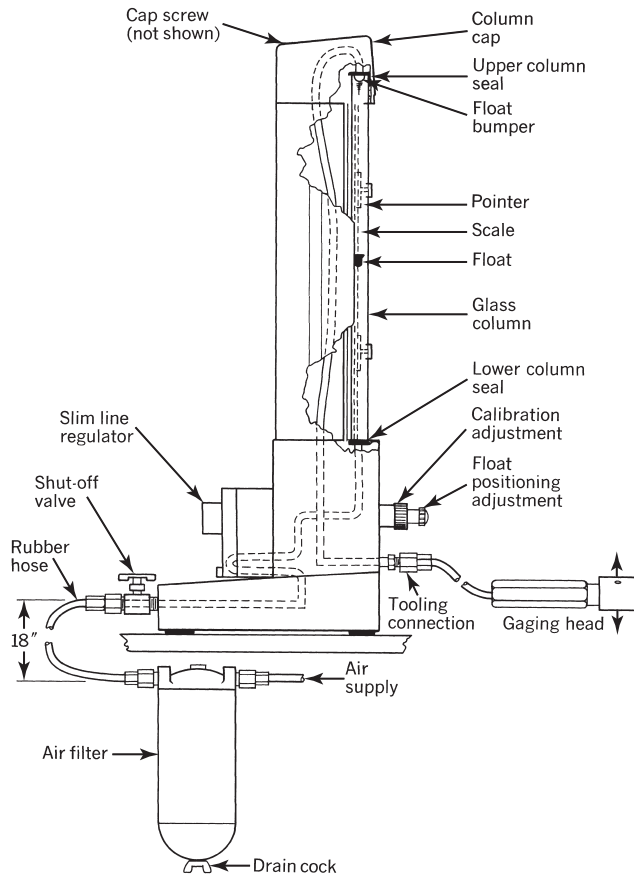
Column-type air gage system (Besly Cutting Tools, Inc.).
